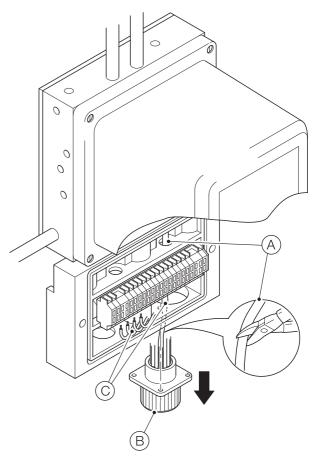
Cuttintg the insulated earth wire at the cable connector
